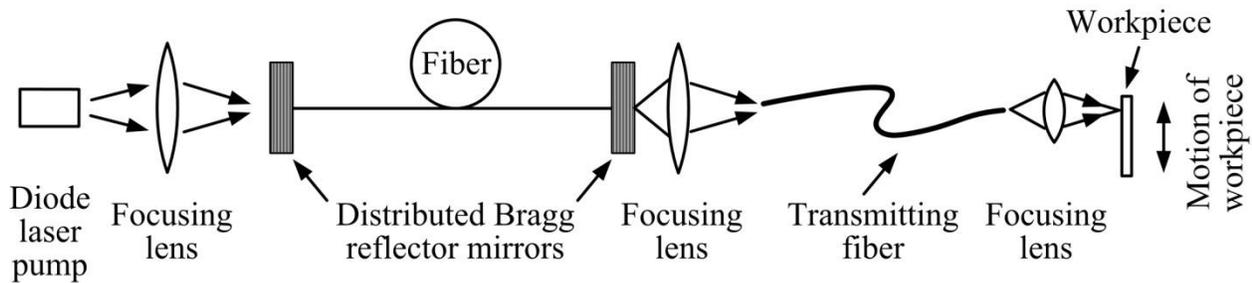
Typical arrangement for welding with a fiber laser.
